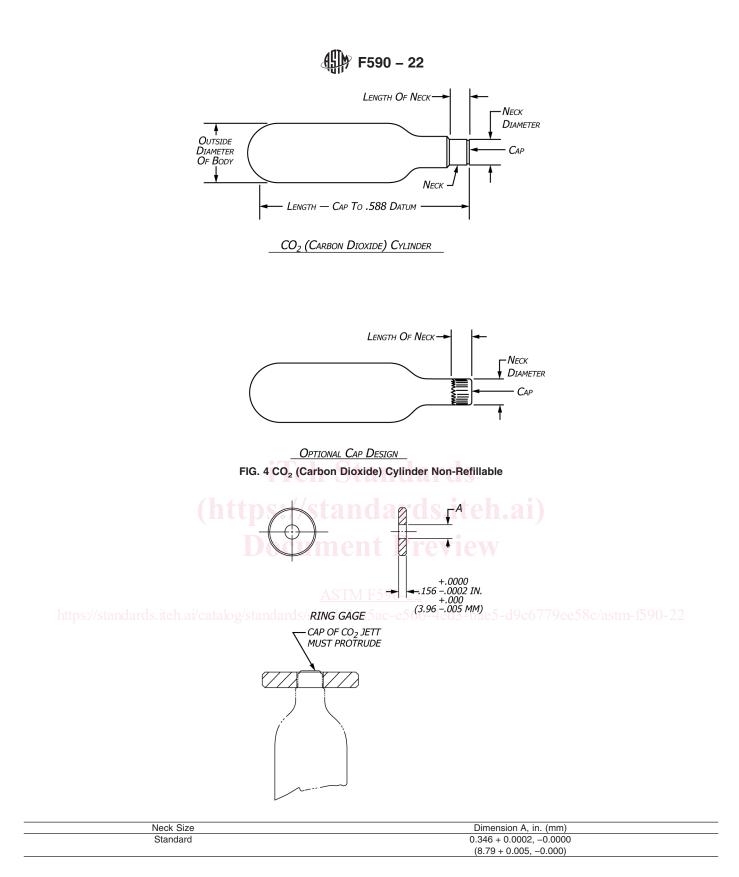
CO₂ Cylinder Non-Refillable Combination GageGauge (C.R.S.) Maximum Neck Diameter and Minimum Neck Length (Standard Neck Cylinder)
